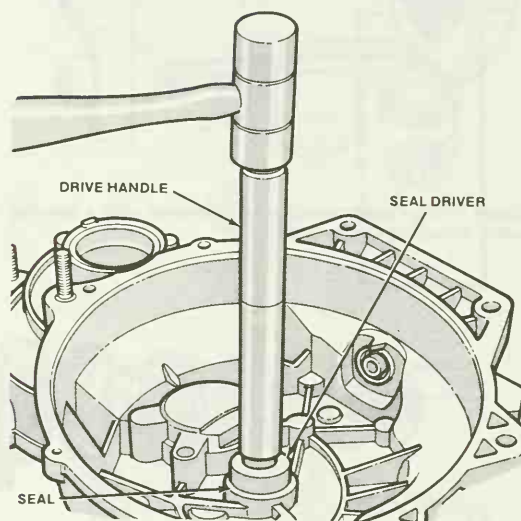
Installing a new mainshaft oil seal in the case. (Chrysler Corporation)
